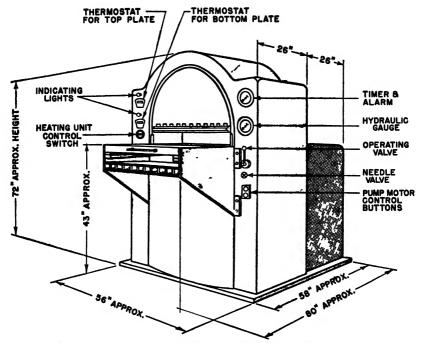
Parts and principal dimensions of a typical vulcanizer for curing rubber printing plates.
